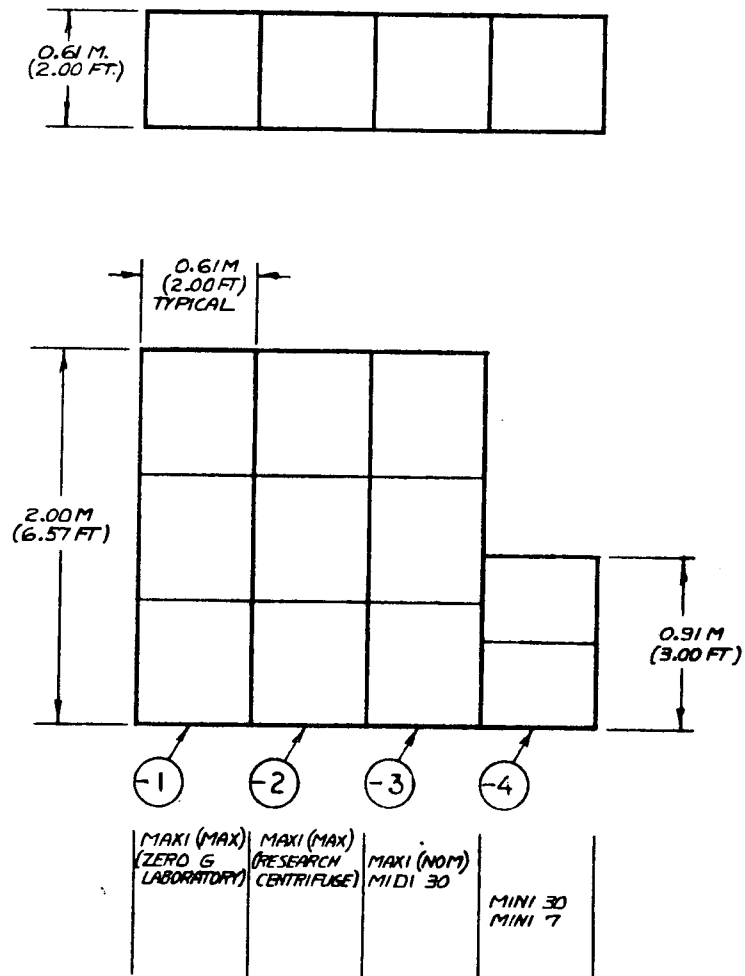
Equipment Unit EU-042/071 Holding Unit Support (Sheet 1)
